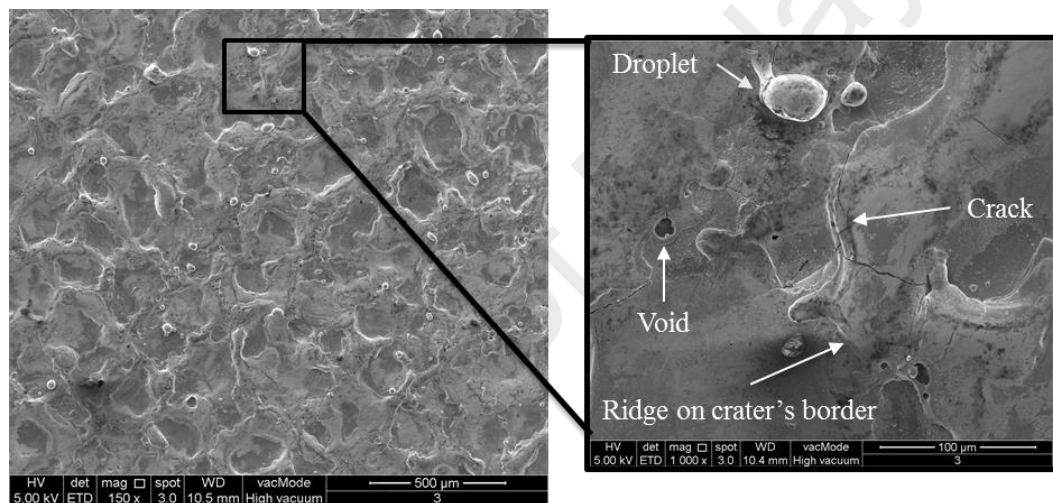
Micro-defects on surface machined by EDM
